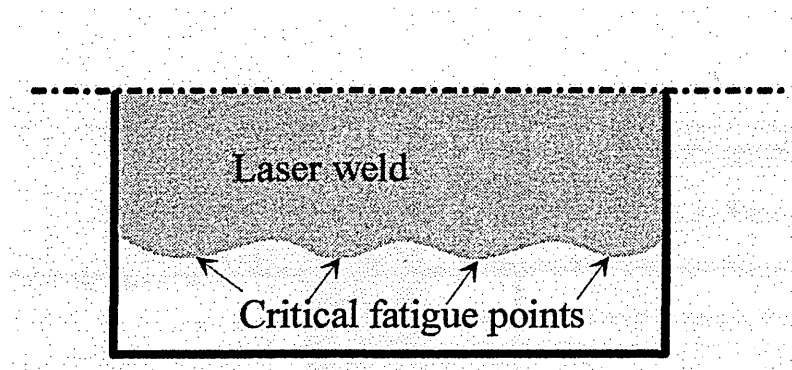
A schematic drawing of a laser-weld from above, showing oscillating weld width, and the location fatigue crack will probably initiate⁷⁰
